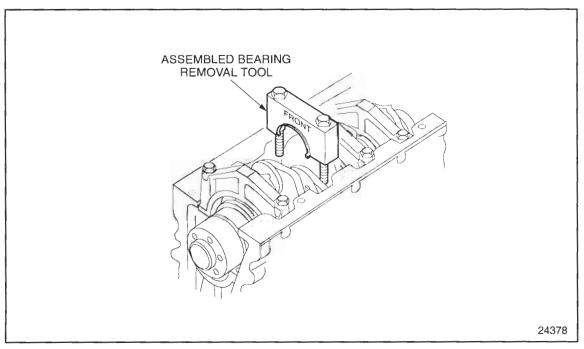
Upper Main Bearing Shell Remover Tool Installation
